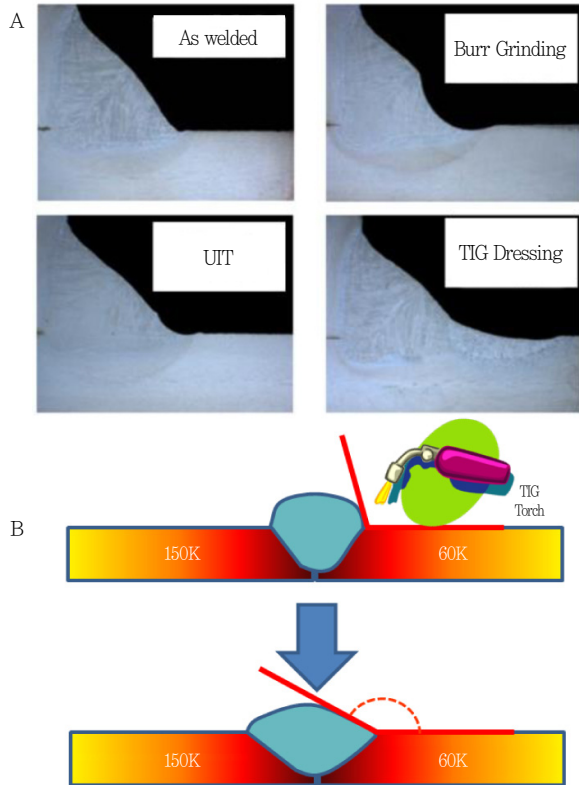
A : Welding Post treatment methods<sup>6)</sup>
